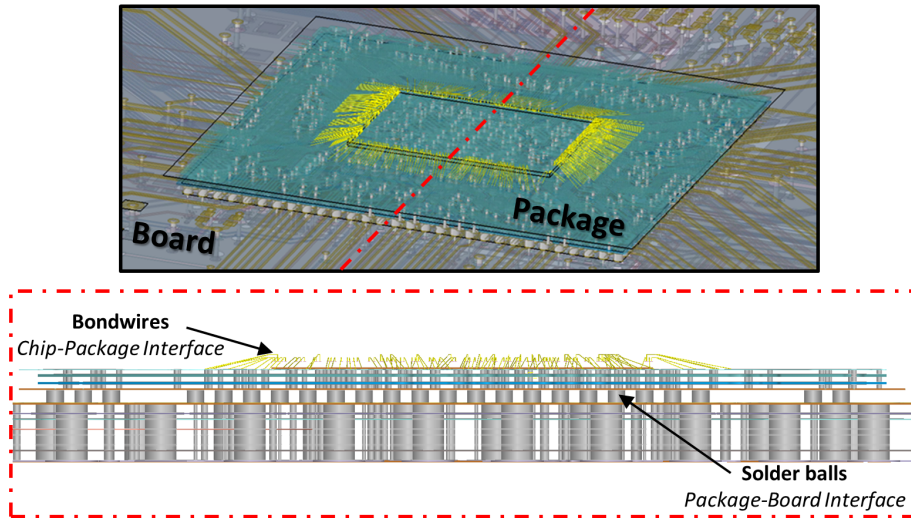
3D view and cross-section of typical package-board interconnects.
